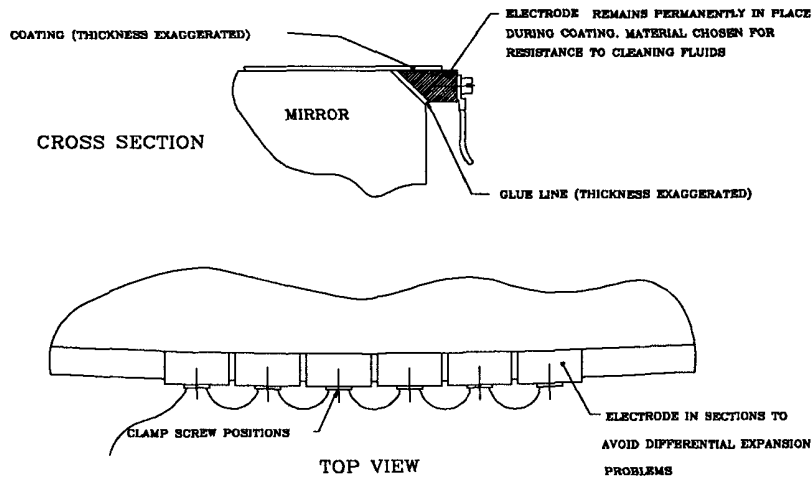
A possible design of the electrode, exploiting the chamfer at the edge of the mirror to save space and to allow a flush coating surface.
